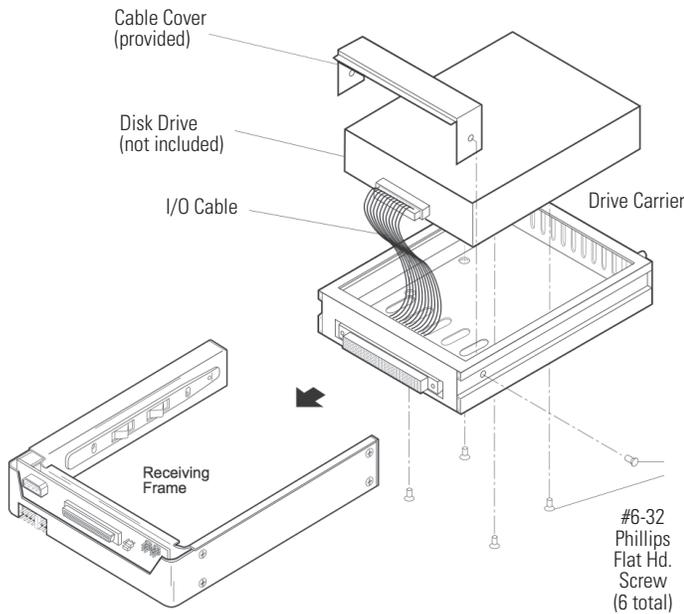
Drive Installation Assembly DE100 SCSI Wide SCA
